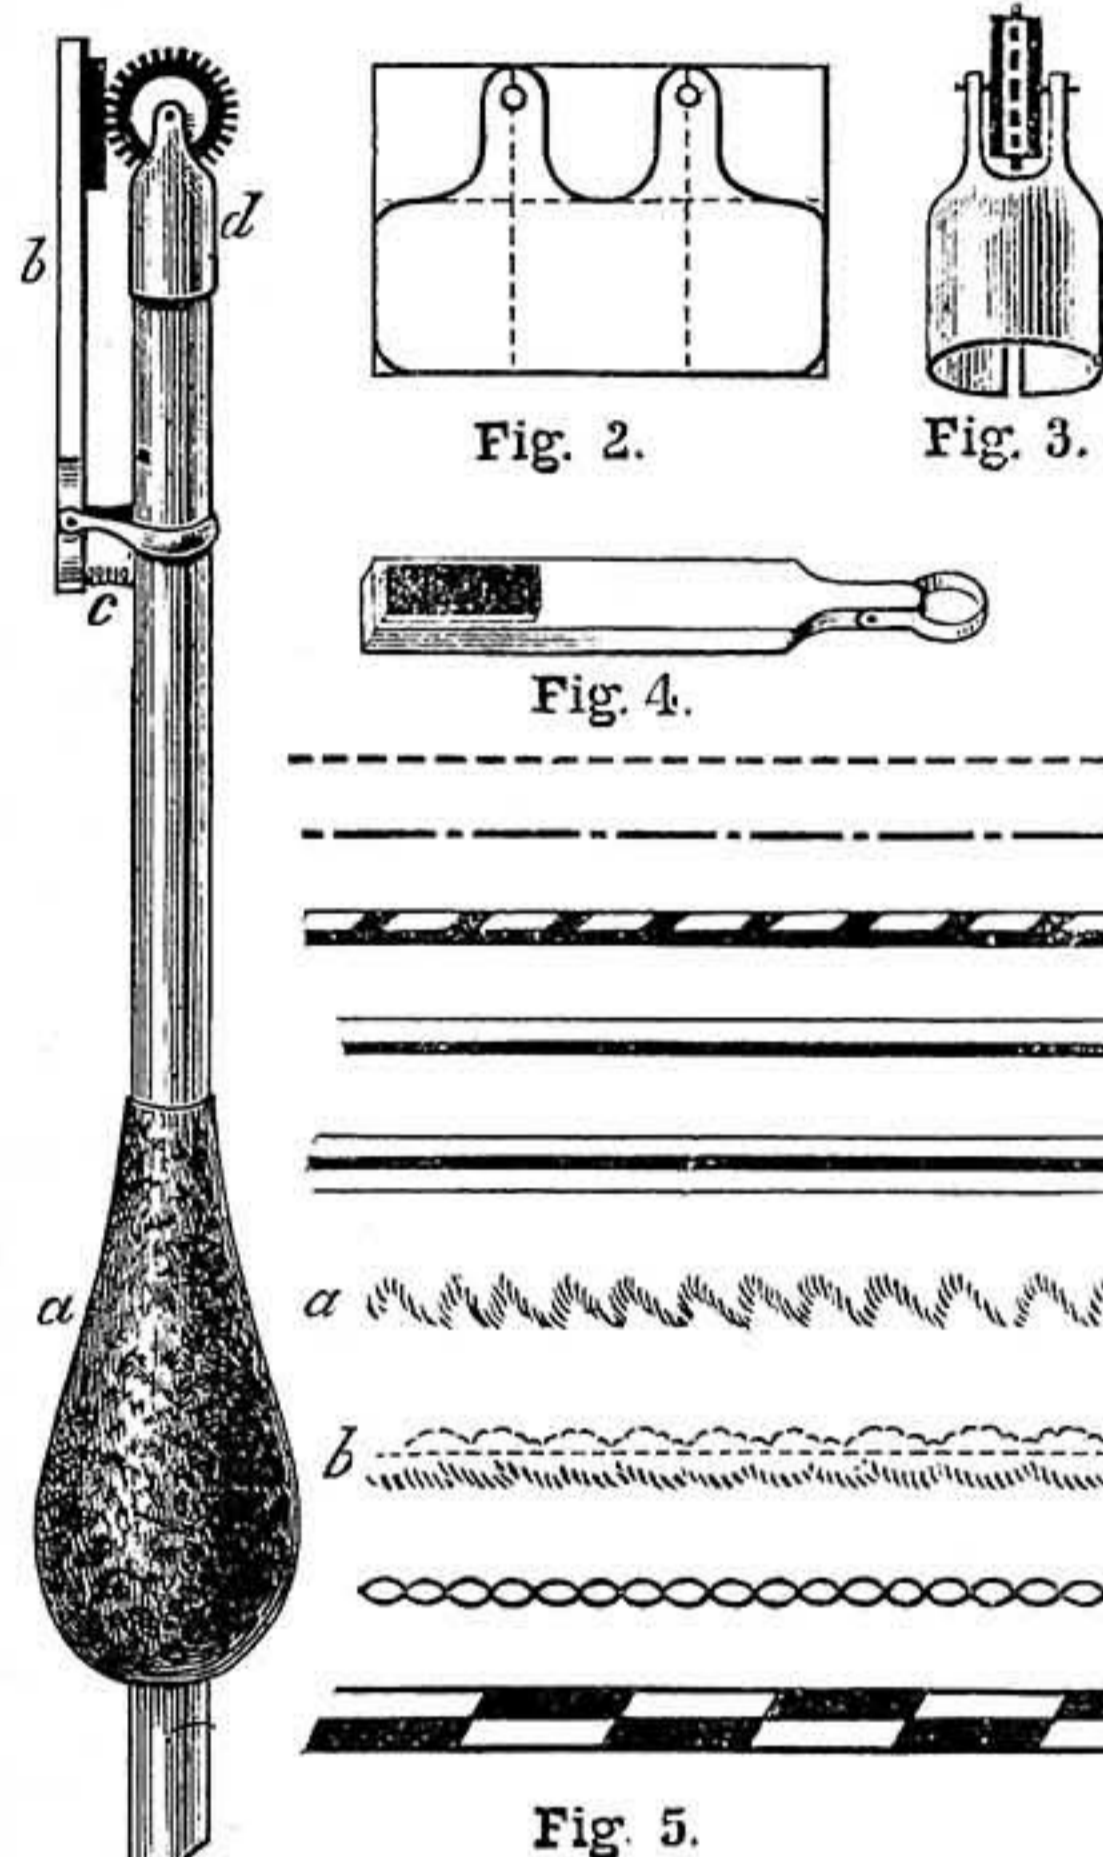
Pen complete. Fig. 2.—Shoulder for Wheel marked off on Brass. Fig. 3.—Shoulder and Wheel complete. Fig. 4.—Inking Pad. Fig. 5.—Designs for Ruling Wheel—*a*, *b*, Mountain Ranges for Map Drawing.
